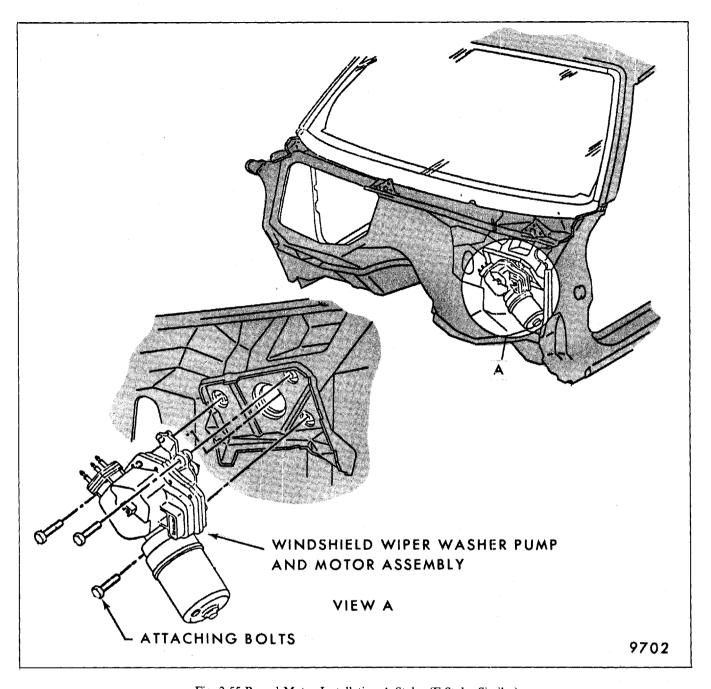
Round Motor Installation A Styles (F Styles Similar)
